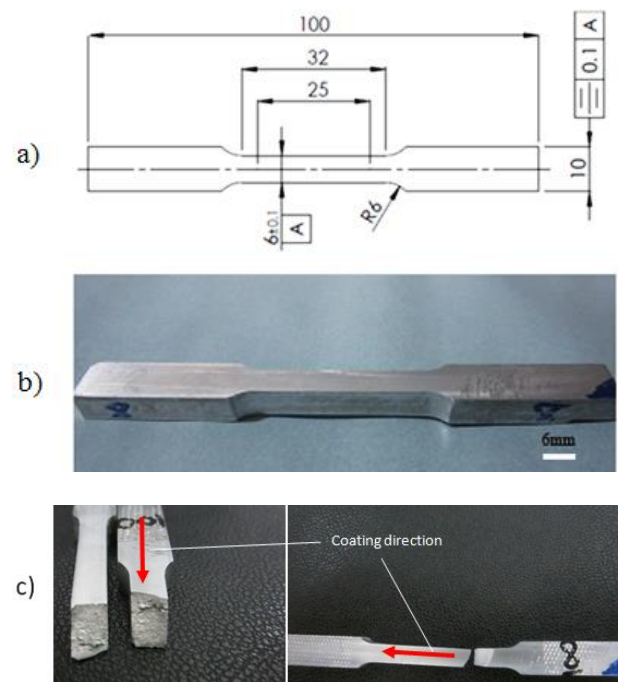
Tensile test specimen according to standard ASTM-E8M a) dimensions of the specimen (in millimeters) b) machined tensile specimen c) coating direction on the tested specimen.
